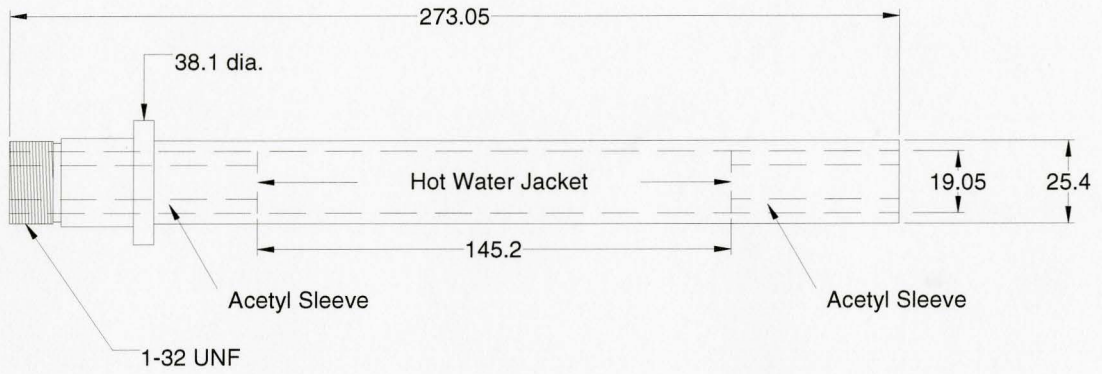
Schematic of the smooth test section; dimensions in mm.
